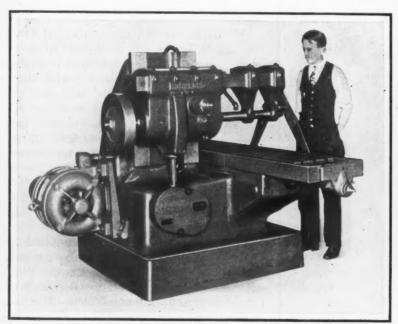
New "Rigidmil" Brought out by the Sundstrand Machine Tool Co.
